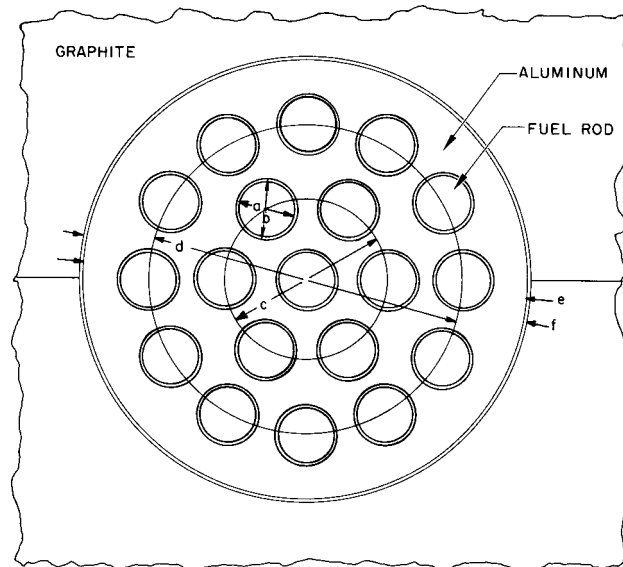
Cross Sectional View of Fuel Cluster With Dimensions
